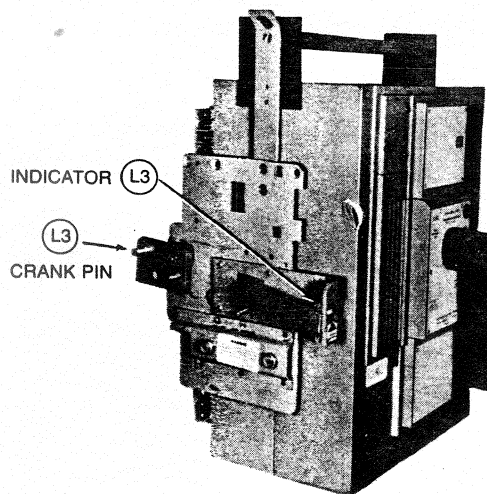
CARRIAGE ASSEMBLY—LEFT SIDE
